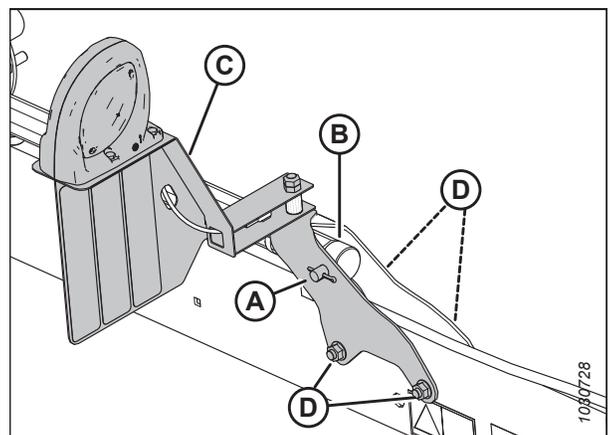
Left Reel Arm Cylinder in Forward Position
